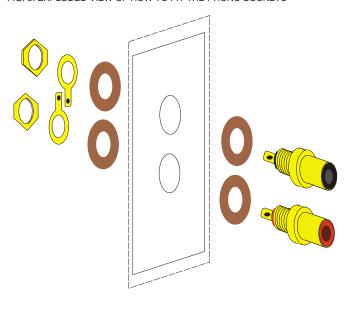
EXPLODED VIEW OF HOW TO FIT THE PHONO SOCKETS
